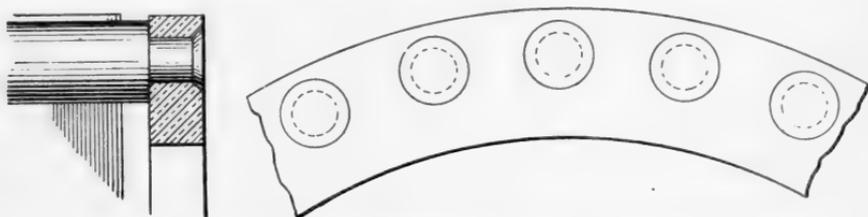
Typical methods of fastening end rings to circular Rotor Bars.
